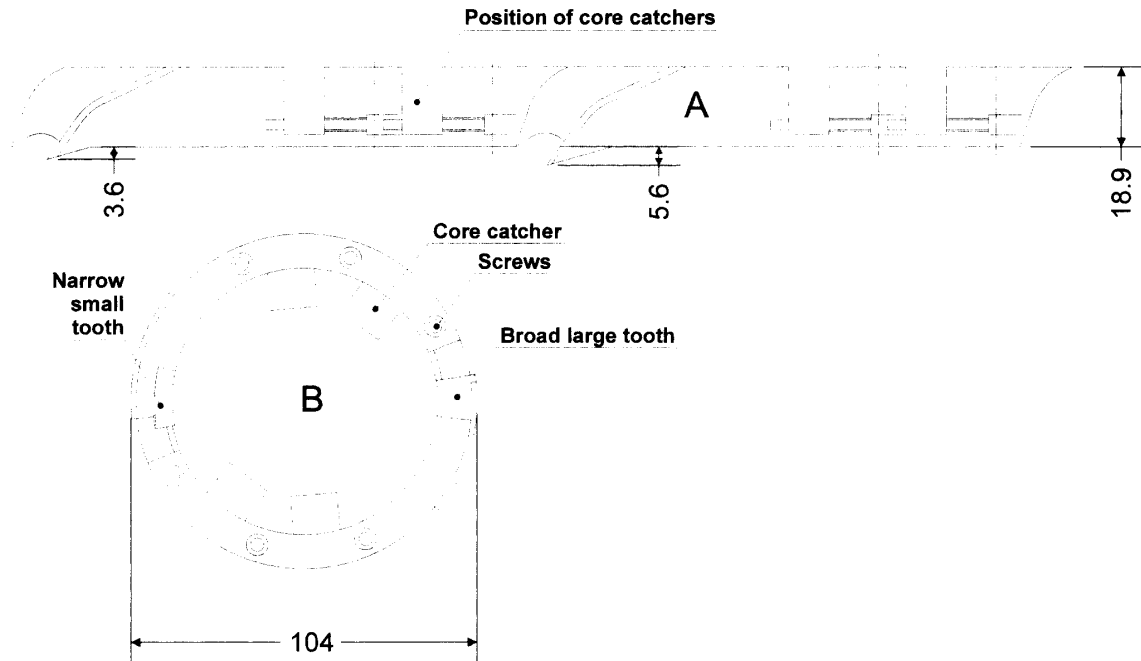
Unrolled drawing of the one-piece cutting ring (A) and illustration showing the position of the 4 core catchers and the cutters (B) (sizes in mm).
